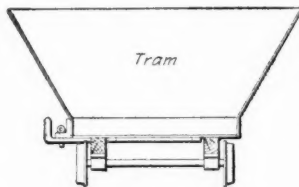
CROSS-SECTION, BUNKER CONVEYOR
